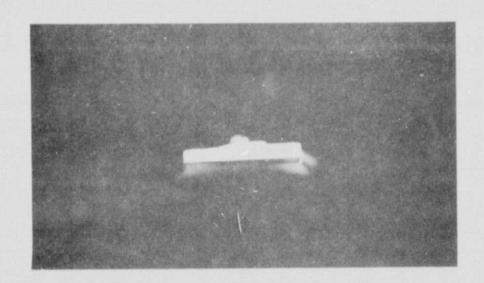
Cross section of weldable strain gage plasma sprayed to titanium fatigue specimen.
